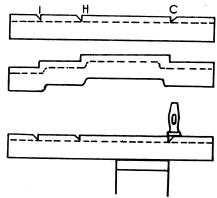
SHAPING AND WELDING ANGLE BARS.
